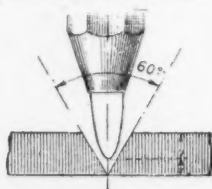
POSITION OF THE TORCH, TIP OF FLAME IN ANGLE FORMED BY THE CHAMFERS
